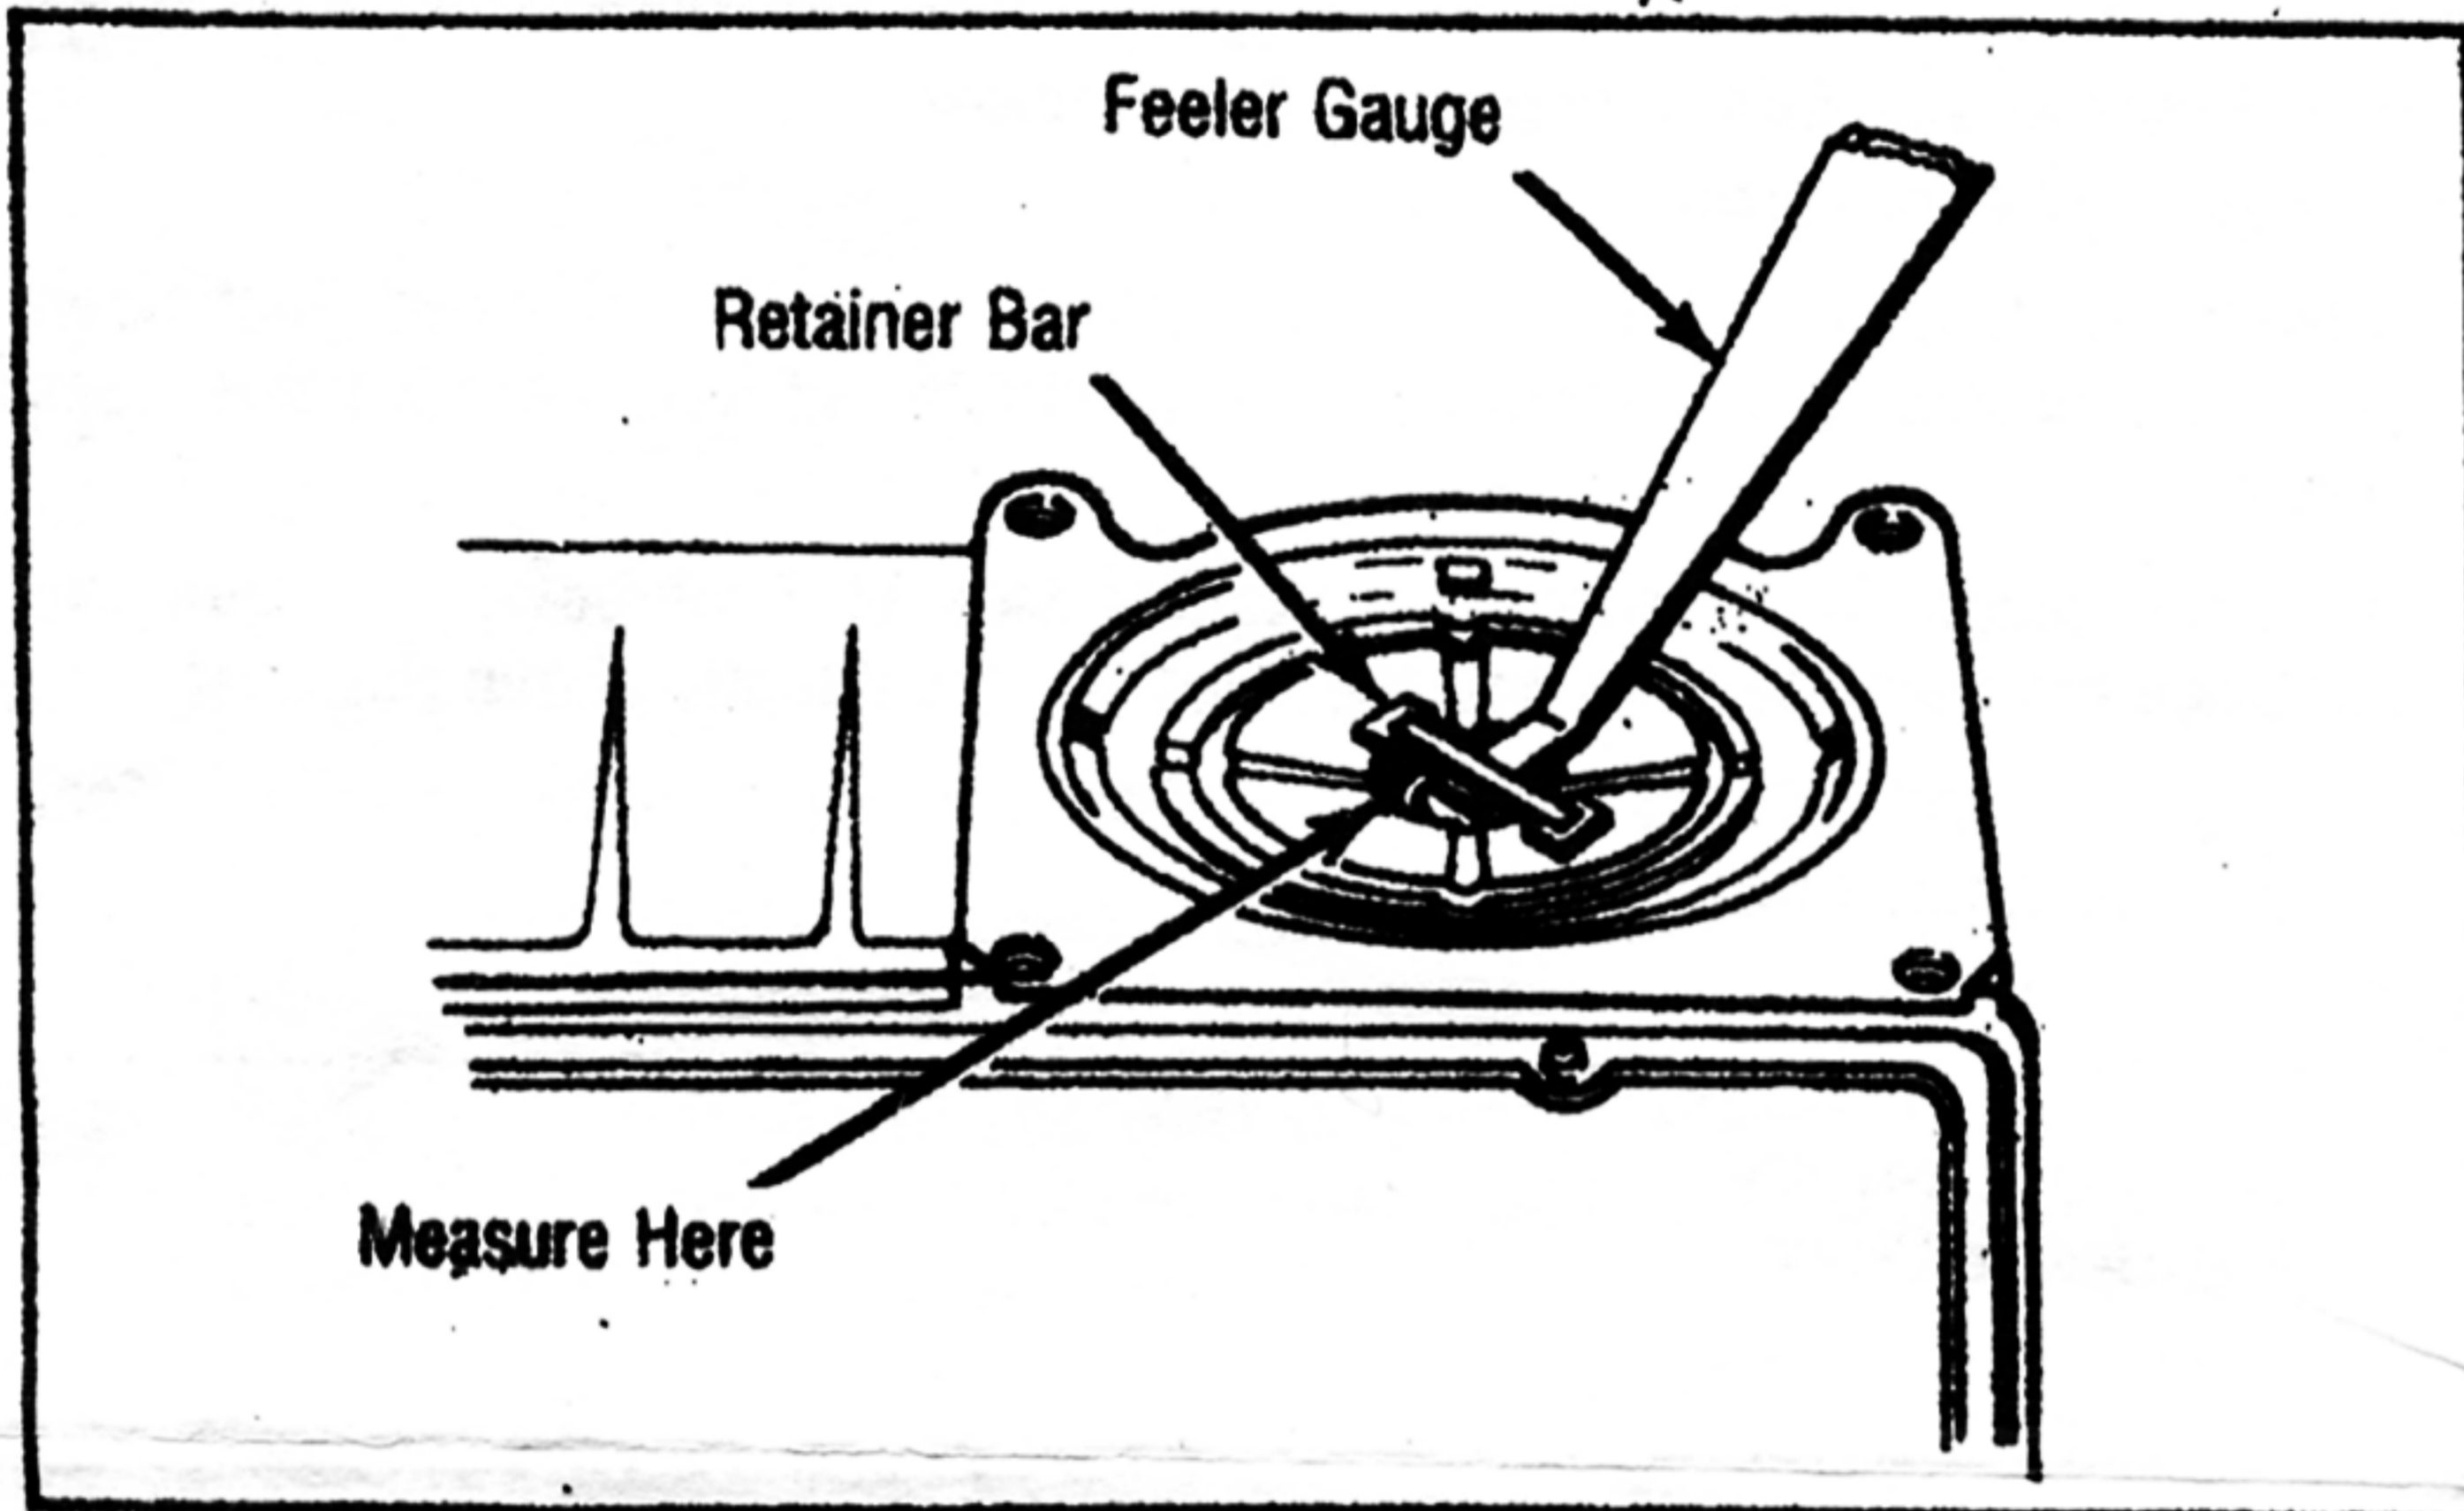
Accelerator Pump Inlet Check Ball Clearance (Models With Check Ball Retainer Bar Only)
